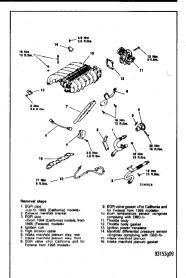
Exploded view of air intake plenum assembly—3.0L SOHC engine
